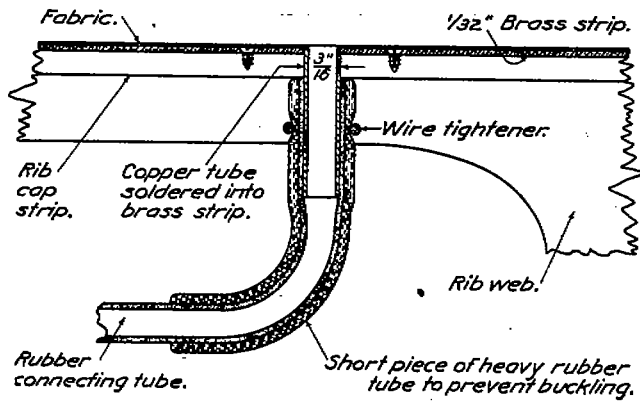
METHOD OF ATTACHING PRESSURE TUBES TO SURFACE OF TAIL PLANE.
